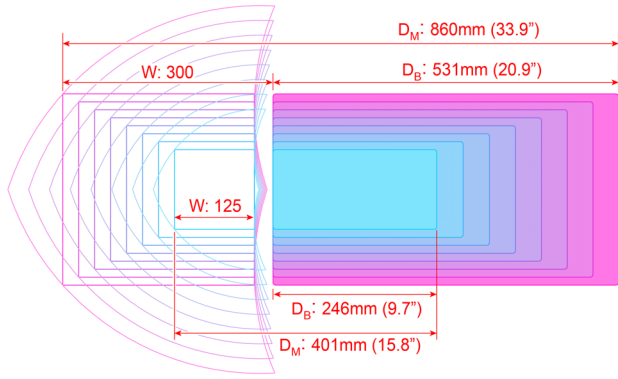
Example machine dimensions for square workspaces with an LSE of 100%
